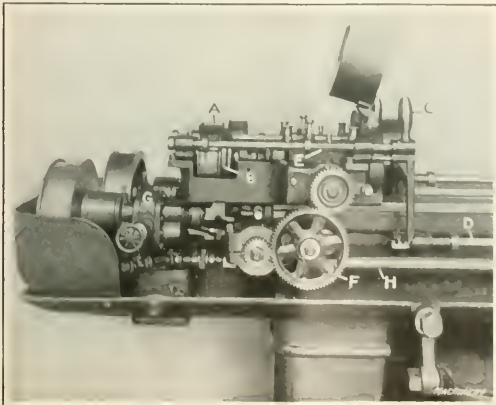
Close View of Driving Mechanism with Gear Guard removed
